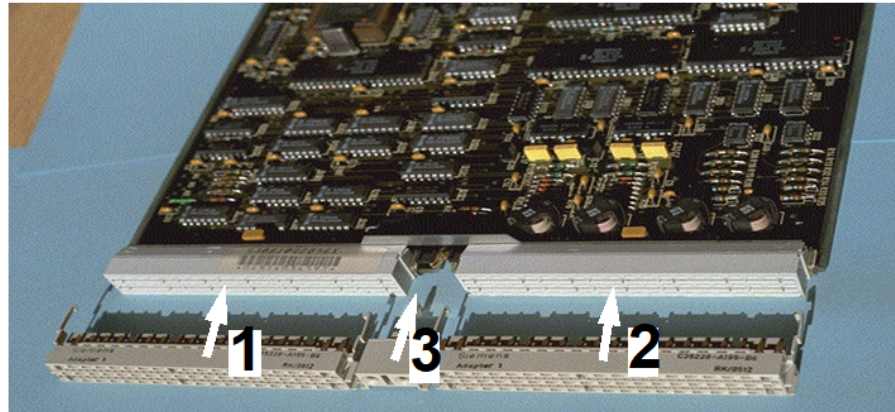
Installing SIVAPAC-to-SIPAC adapter 1 (1 of 2)
